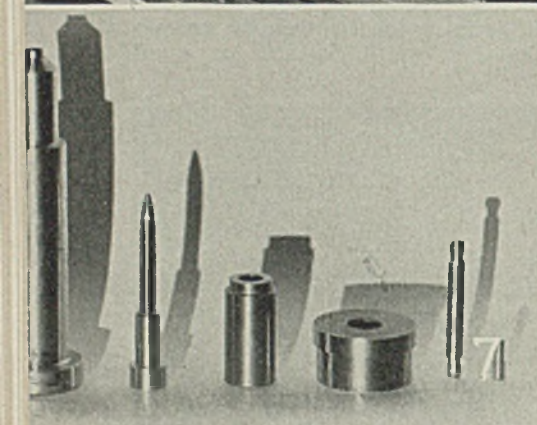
Instead of making dies for stamping vanity and cigarette cases, the tool room of this small shop designed and built a number of cylindrical grinders with which it produces many different ordnance parts, including those shown here. They are: left to right, a crimping punch, contour hob, 30-caliber bullet cover die, loading fixture part, ball gage, loading fixture anvil
